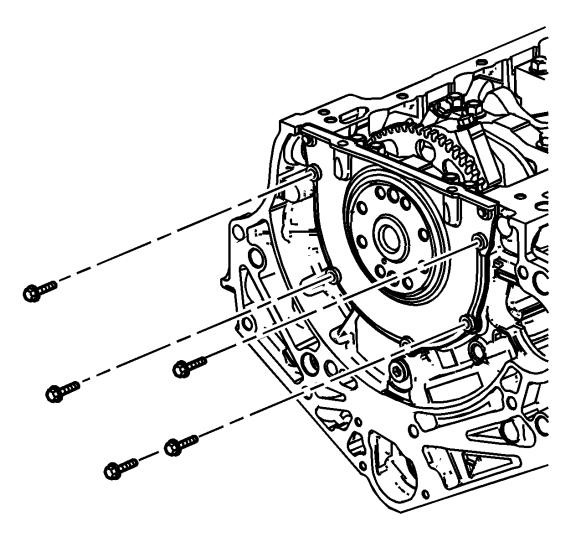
Locating Crankshaft Rear Oil Seal Housing Bolts Courtesy of GENERAL MOTORS COMPANY
